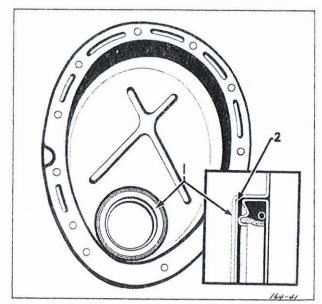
Chain Case Cover Oil Seal 1—Chain case cover and oil seal 2—Oil seal gasket
